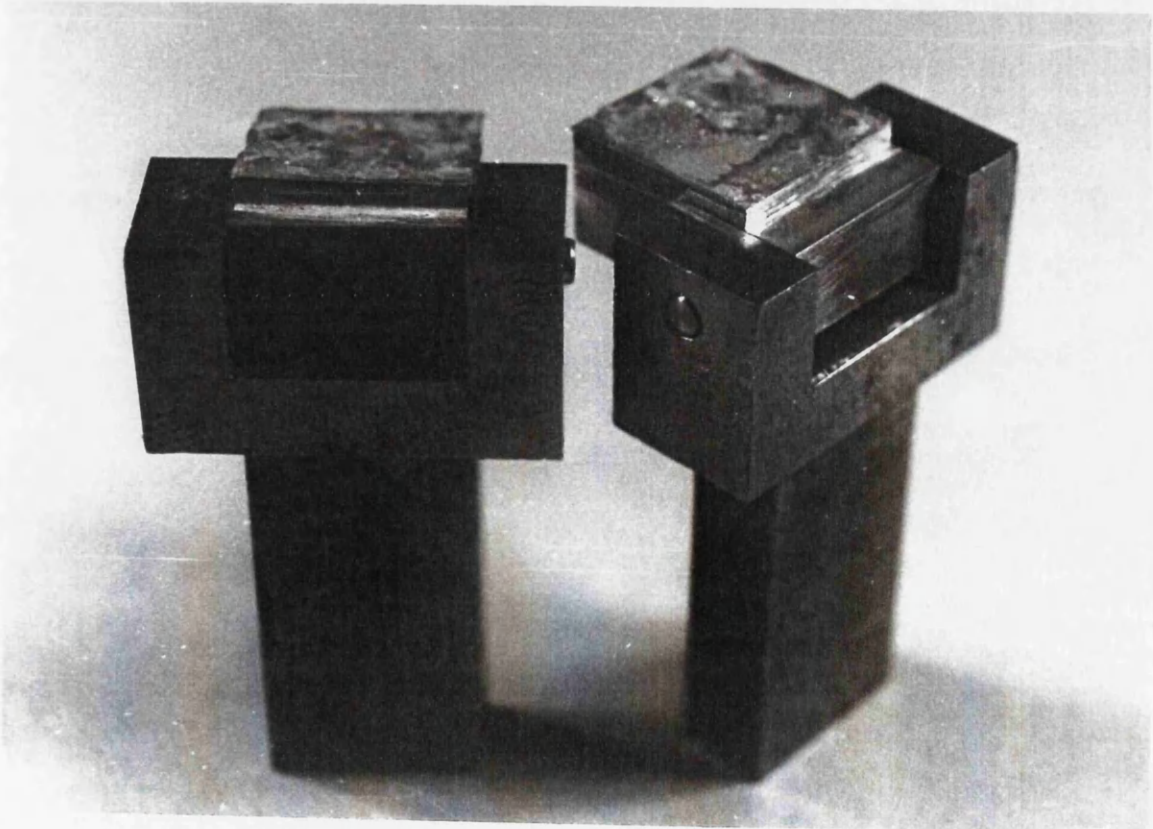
LOADING YOKES FOR TENSILE CLEAVAGE SPECIMEN
